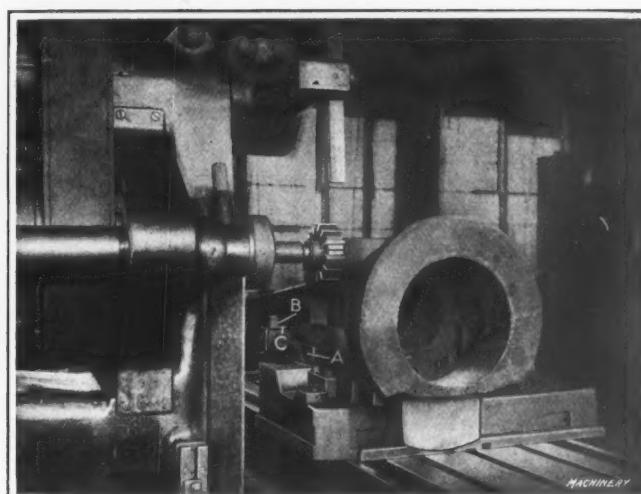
Milling Bearings for Gib and Plate that hold Cutter-slide in Place
